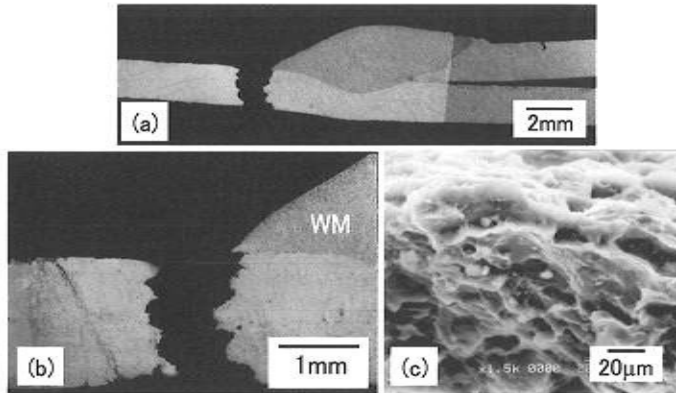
(a) Macro-and (b) microstructure of cross section of MIG lap joint welds after tensile test and (c) SEM fracture surface at HAZ; Welding current 58 A, Welding speed 80 A.
